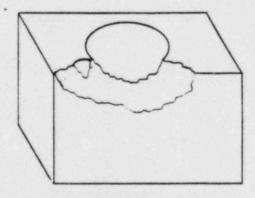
CRACKED TYPE AN PISTON SKIRT
